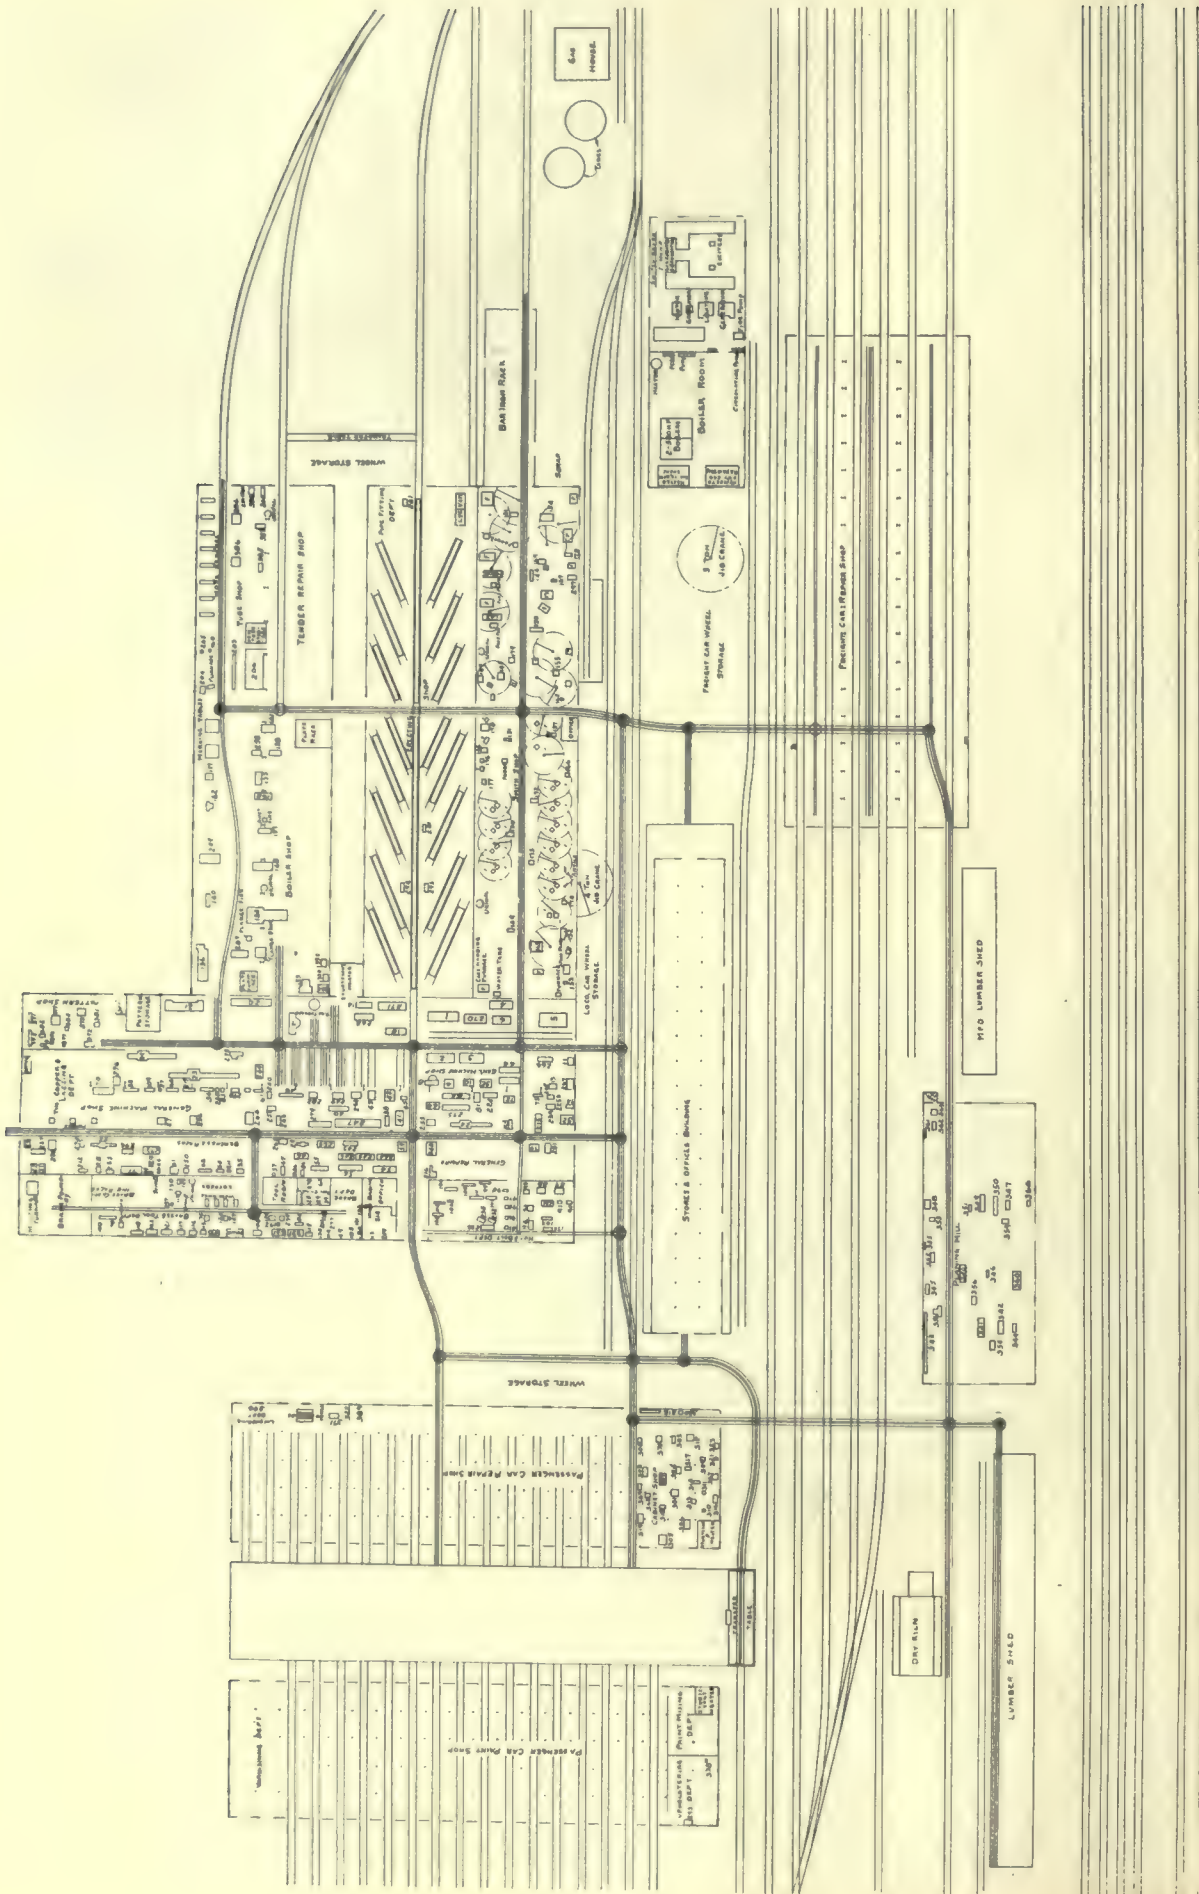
Layout of Shops I. C. R. Moncton, Showing the Machine Tool Arrangement.
